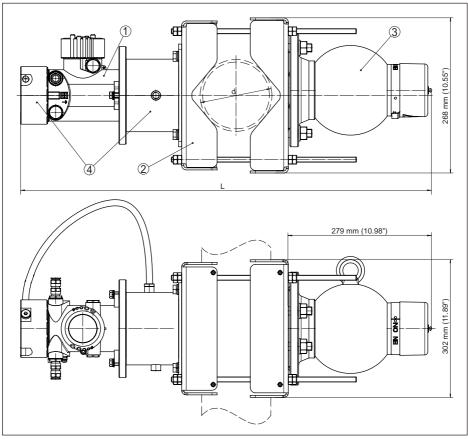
Mounting bracket with horizontally mounted sensor and water cooling
